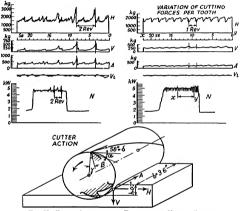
FORCES ACTING AT THE TOOTH OF THE MILLING CUTTER
